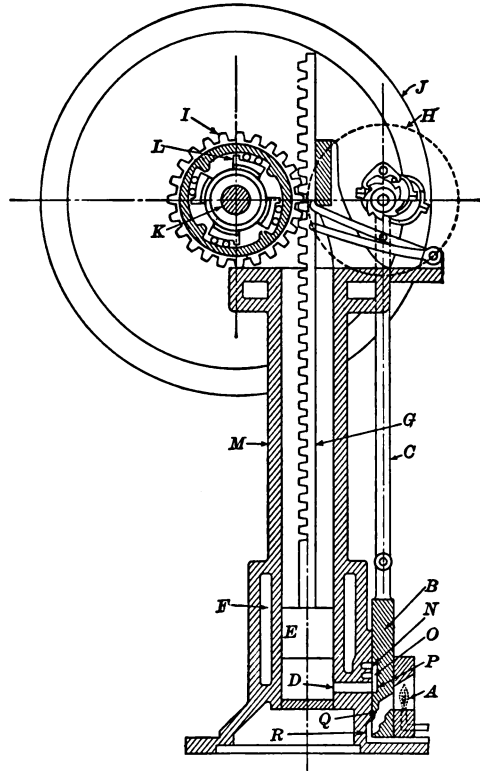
OTTO-LANGEN FREE-PISTON GAS ENGINE
